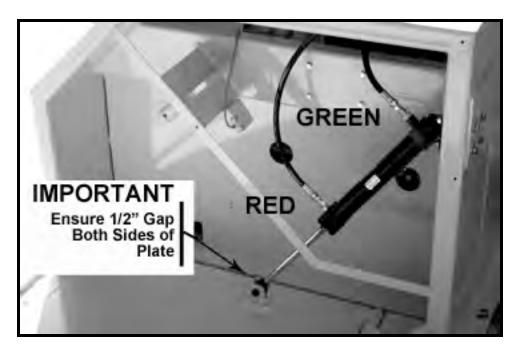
Hydraulic Hose Connection, Control Cabinet
